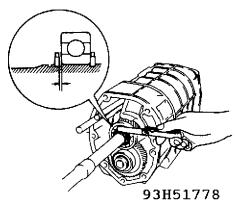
Measuring Clearance Between "C" Washer and Rear Bearing
